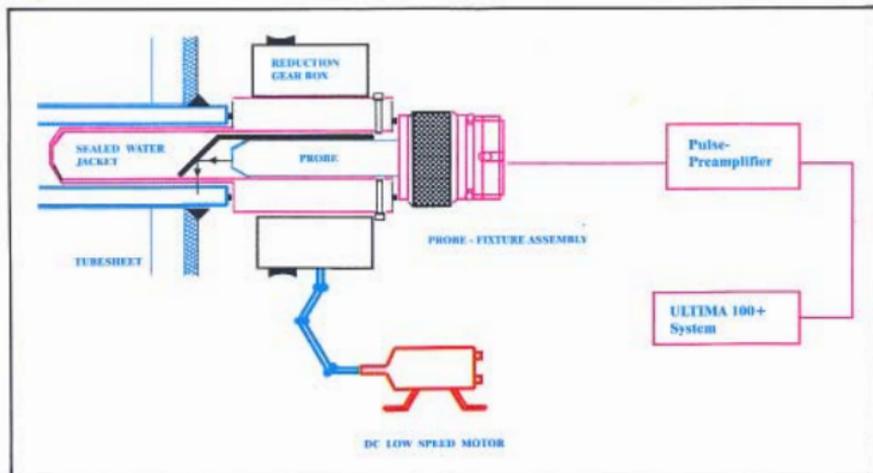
Experimental set-up for ultrasonic imaging of tube to tubesheet weld joint
